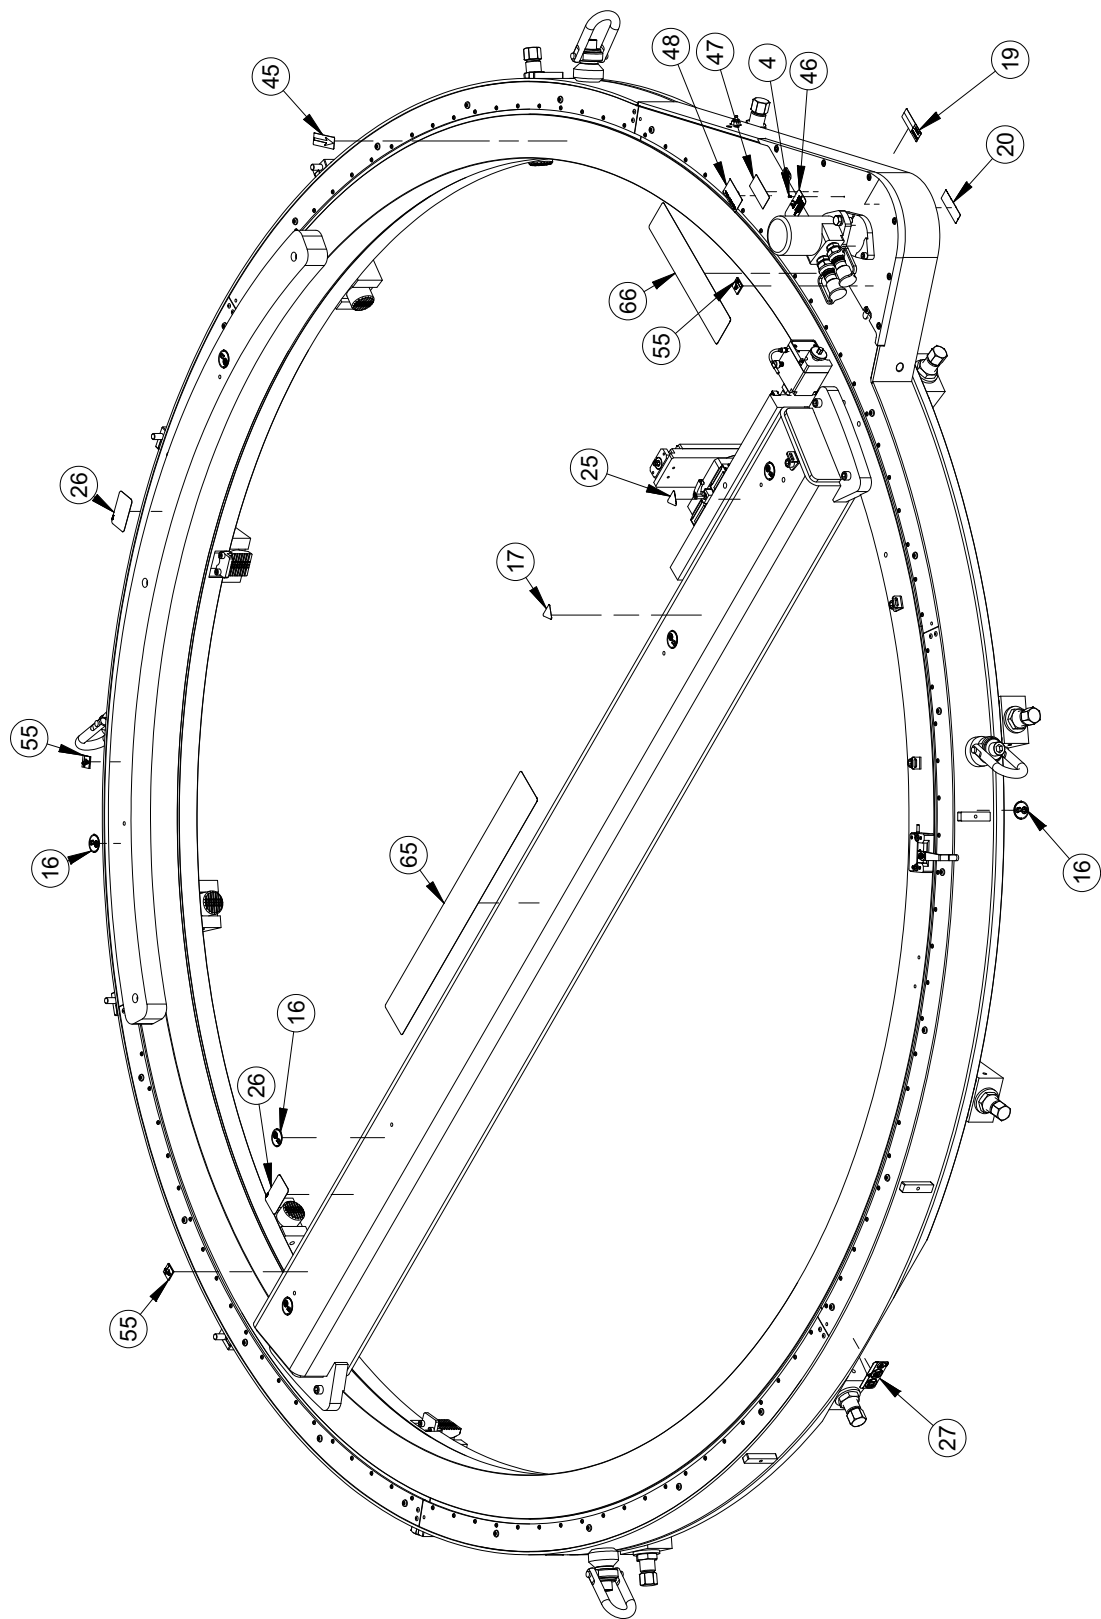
ODF110 SPEED FACER LABEL LOCATIONS (P/N 7639-S2)
